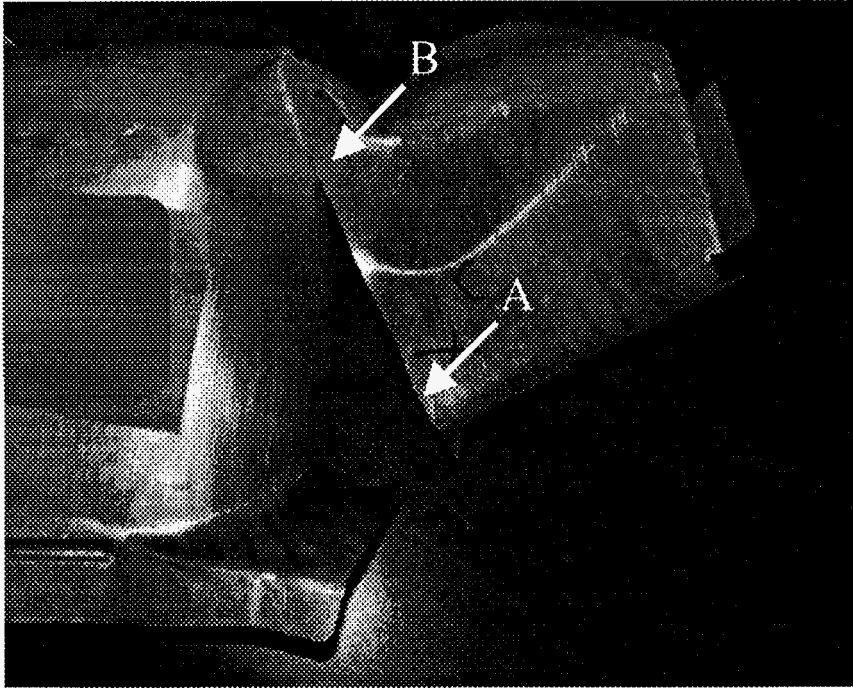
Shock tower part after general impact testing showing brittle fracture initiating at A and arresting at point B.
